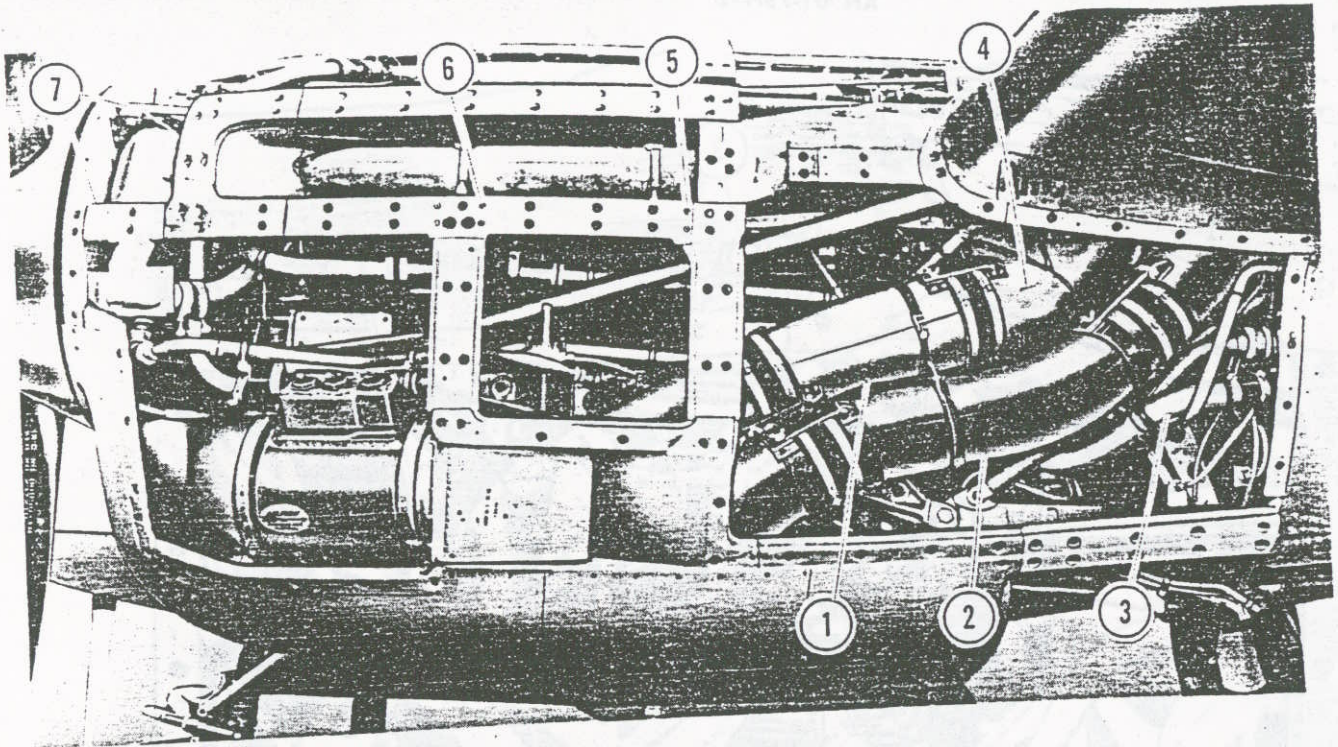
Engine Disconnection Points (Engine Section, Outboard)
